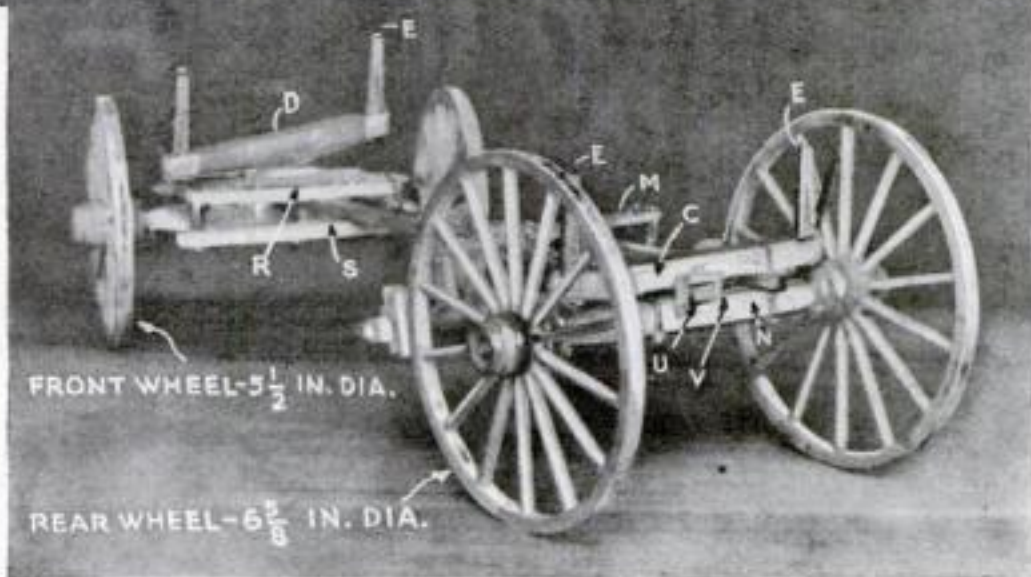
Rear view of the completed covered wagon carriage showing the rear bolster *C* and rear axle *N* assembly, the end of the reach *U*, and the cardboard reach socket *V*.
